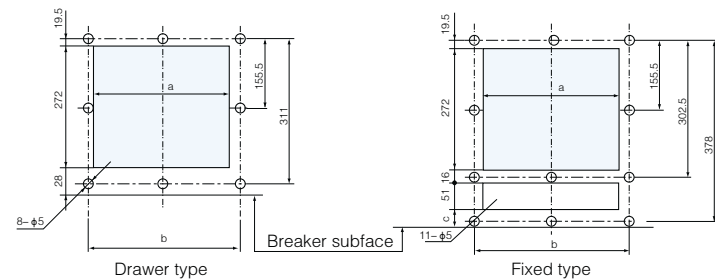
overall and mounting dimensions of drawer type breaker (OW18-6300/4 In=6300A)
